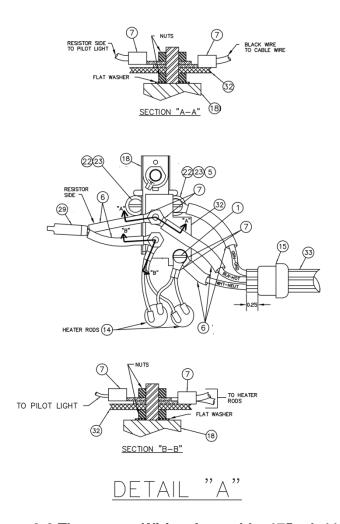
Thermostat Wiring Assembly, 175 ml, 115V
